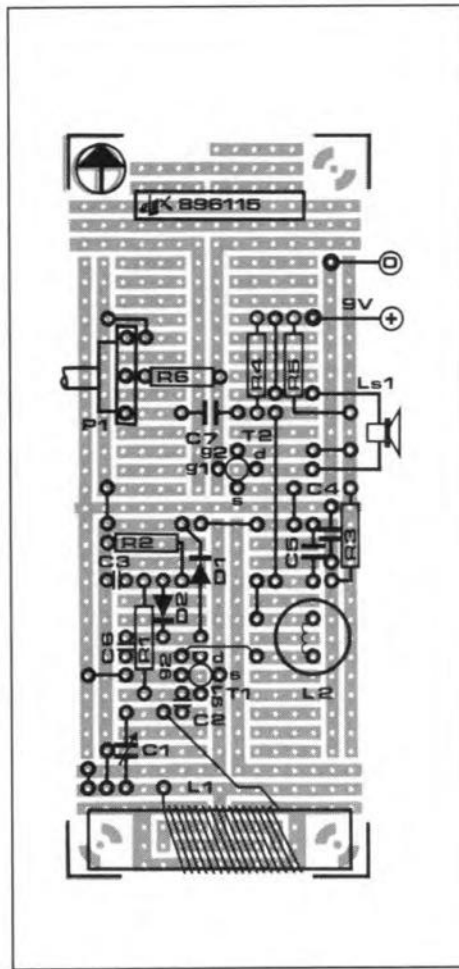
Suggested construction of the receiver on ready-made PCB Type UPBS-1.
